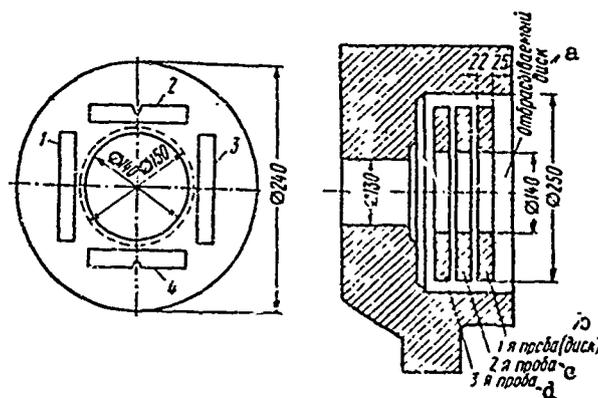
Schematic of removal of samples from the breech for technical metal testing
